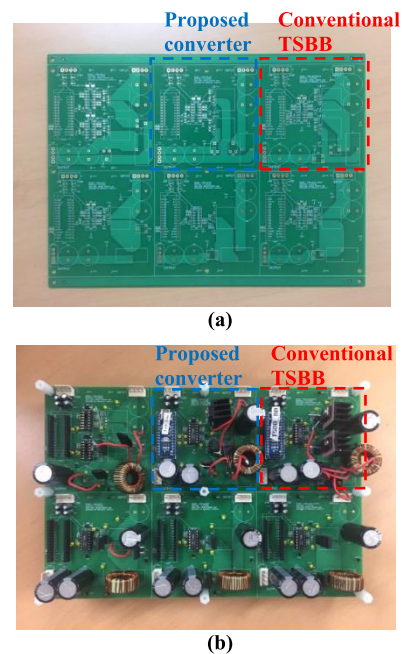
Pictures of the PCB: (a) bare PCB and (b) assembled PCB.
